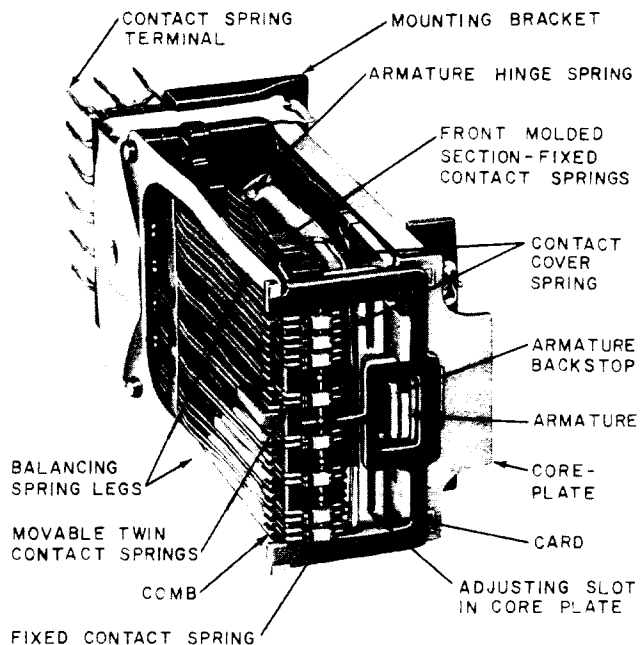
12-Position Wire Spring Relay—Contact Cover Removed
